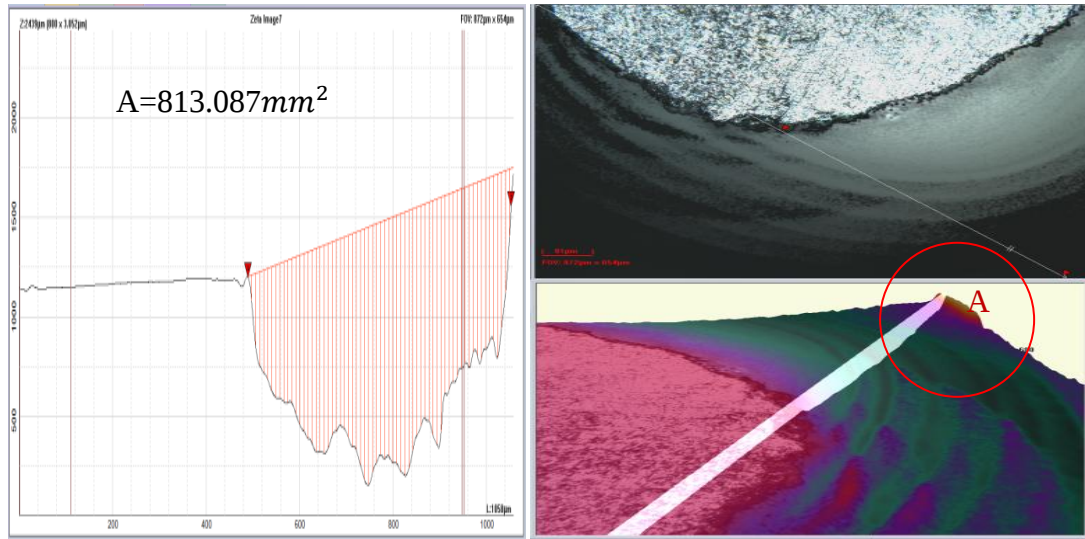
Flank wear of the Single cutting tool at 20X magnification (0.24 mm/rev feed and 1 mm depth of cut)
